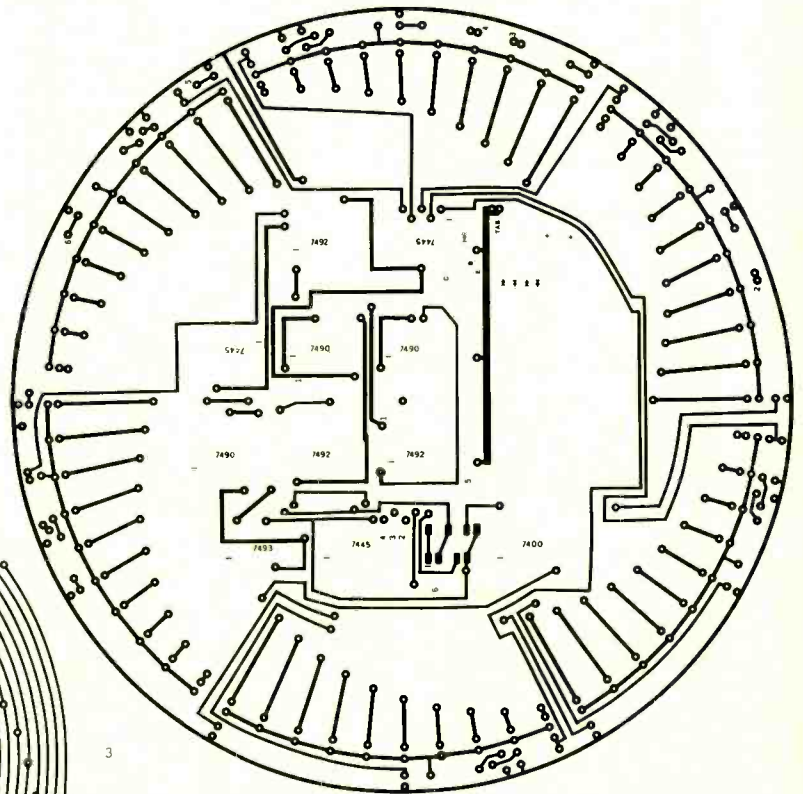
REAR FOIL PATTERN of double-sided PC board shown half size.
